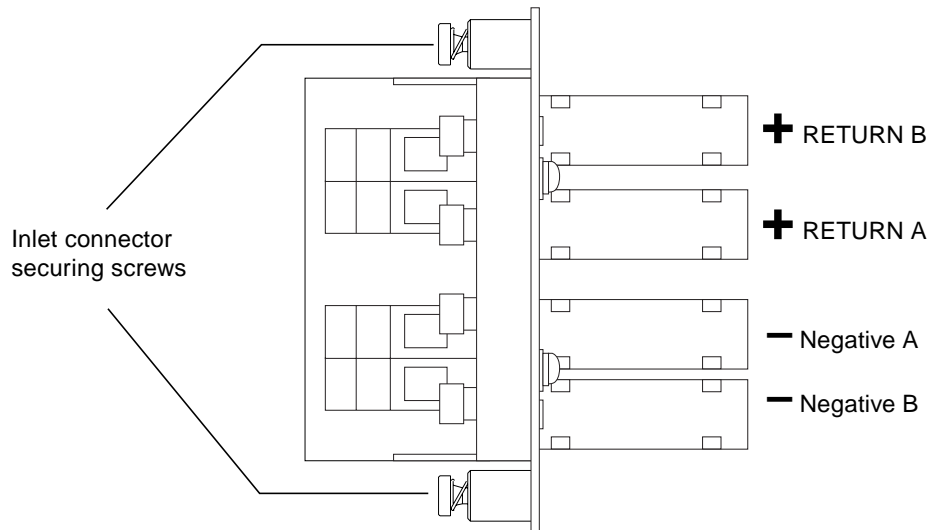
Power Connector Wiring Polarity and Securing Screws
